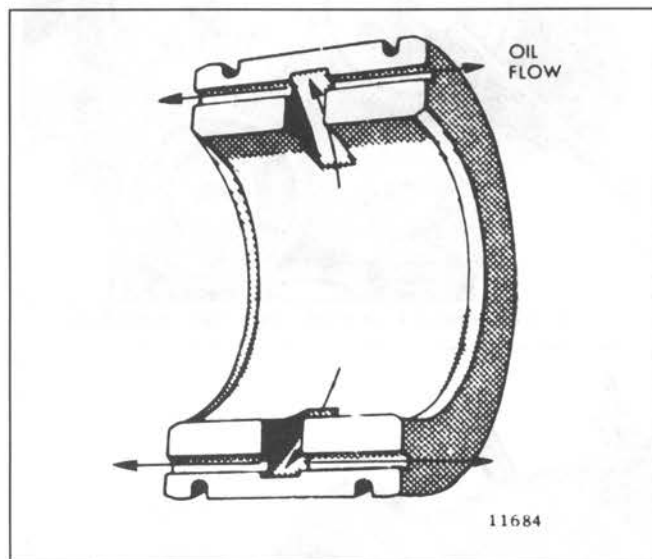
Camshaft Intermediate Bearing (Lower Half)
